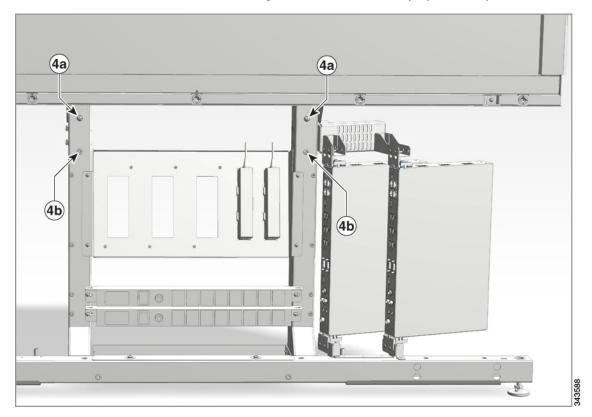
Facade Bracket Installation (3 of 5)—Mounting the Bracket to the Display Assembly and Pressing it Flush Against the Underside of the Display
